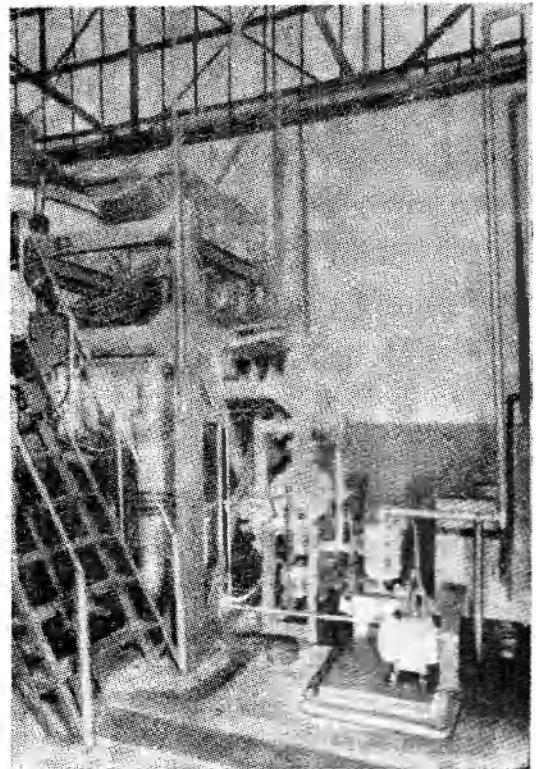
Arrangement of Vacuum Furnace showing a partial view of the chamber, diffusion pump and mechanical pumps (left to right)
